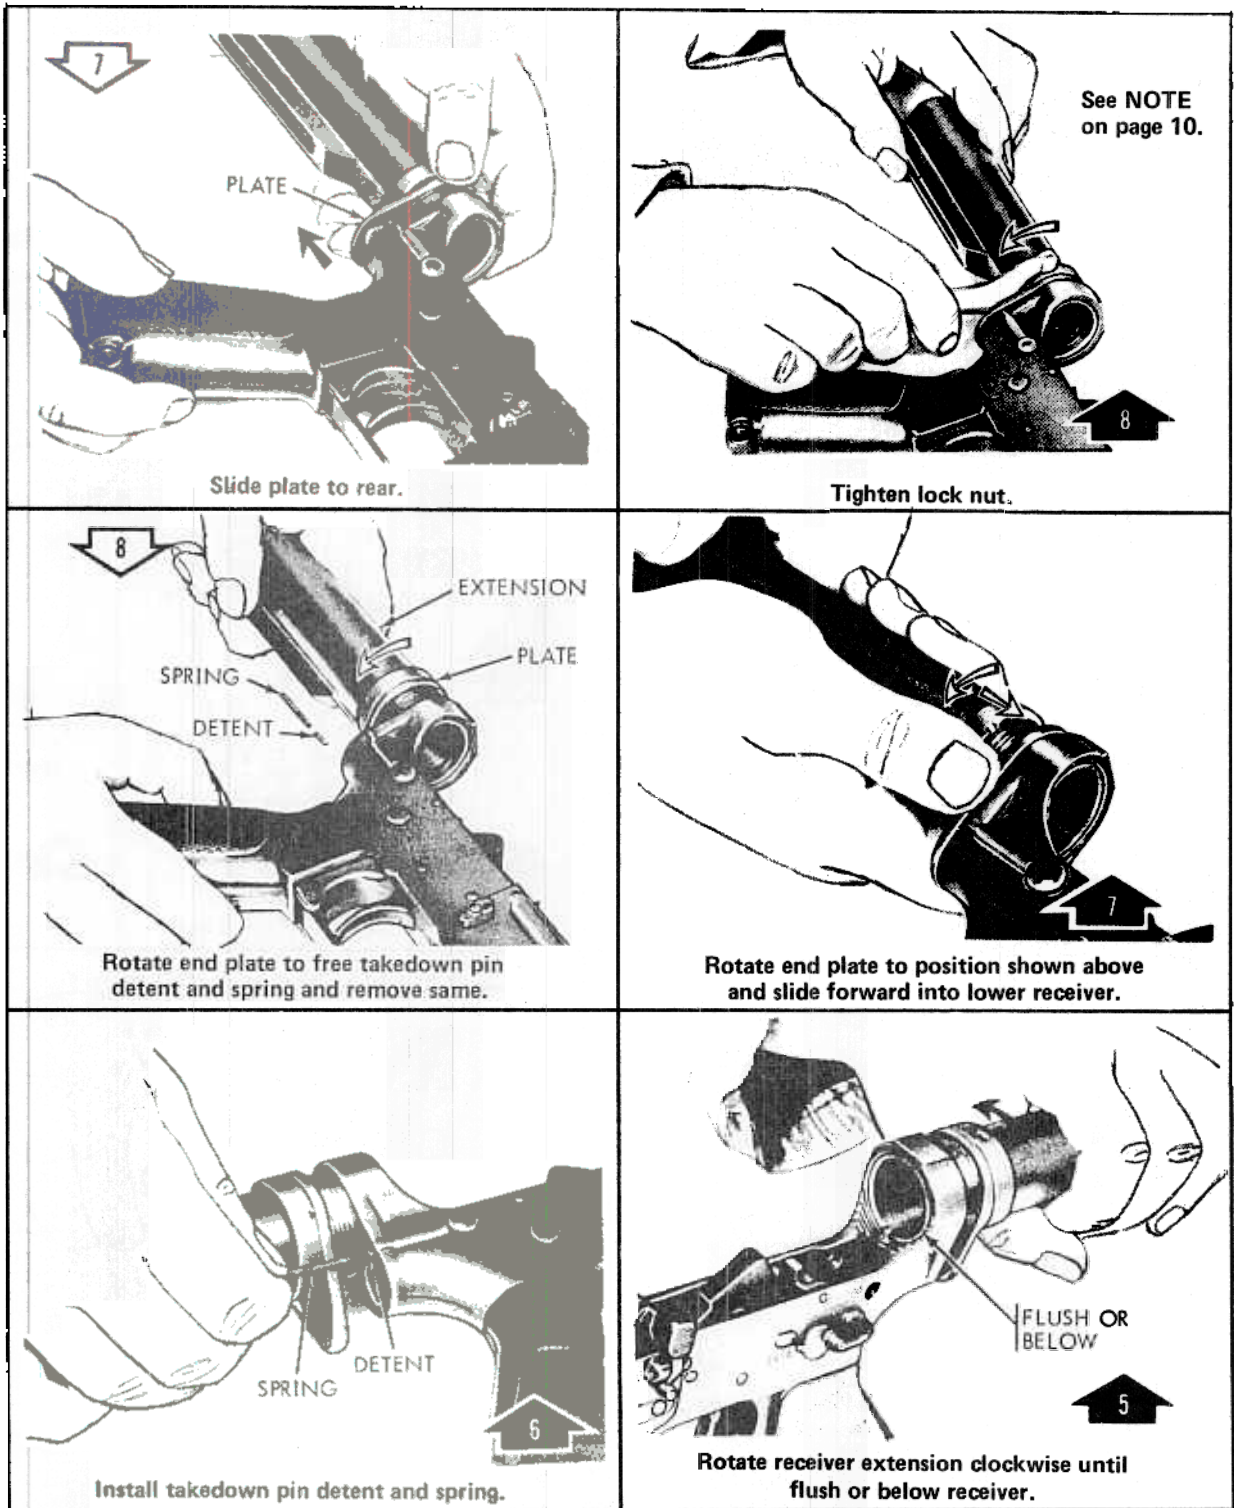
Disassembly/Assembly of the Commando Submachine Gun.
